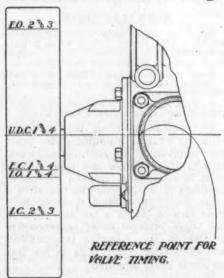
Diagram showing the markings on the flywheel to be used in checking the valve timing of the 1915 Reo engine
